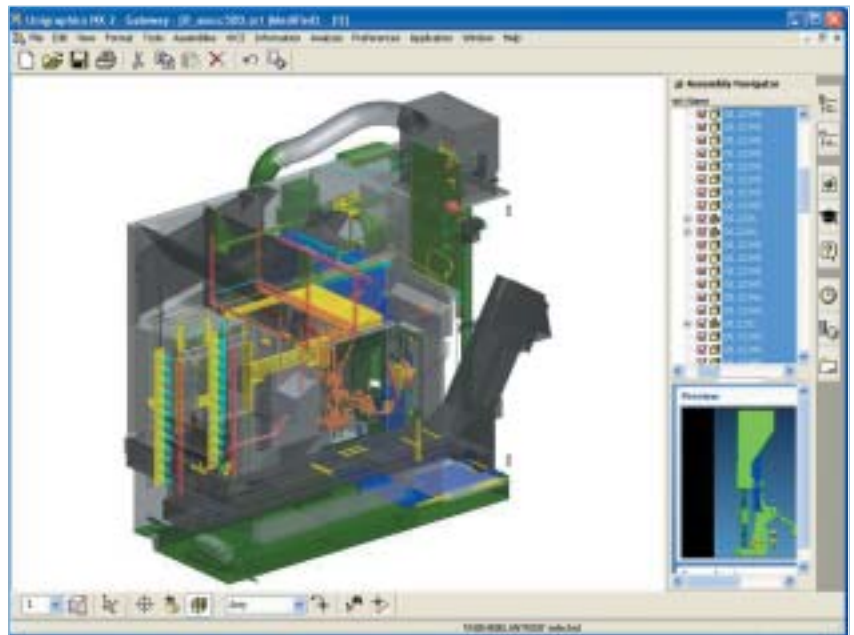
This Hermle CNC assembly comprises 1,300 unique parts—4,000 components total—yet takes up only about 600MB on disk. Unigraphics has historically performed well with larger assemblies. If you do push the envelope (say 100,000 components), several tools are available to speed your workflow. You can choose to load faceted representations instead of B-reps and use simplified geometry or shrink-wrapped versions of components and subassemblies.
